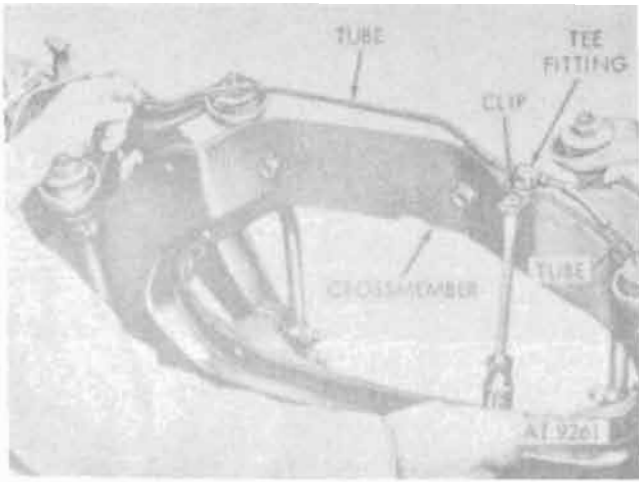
Front brake tube assembly, "tee" fitting clip
